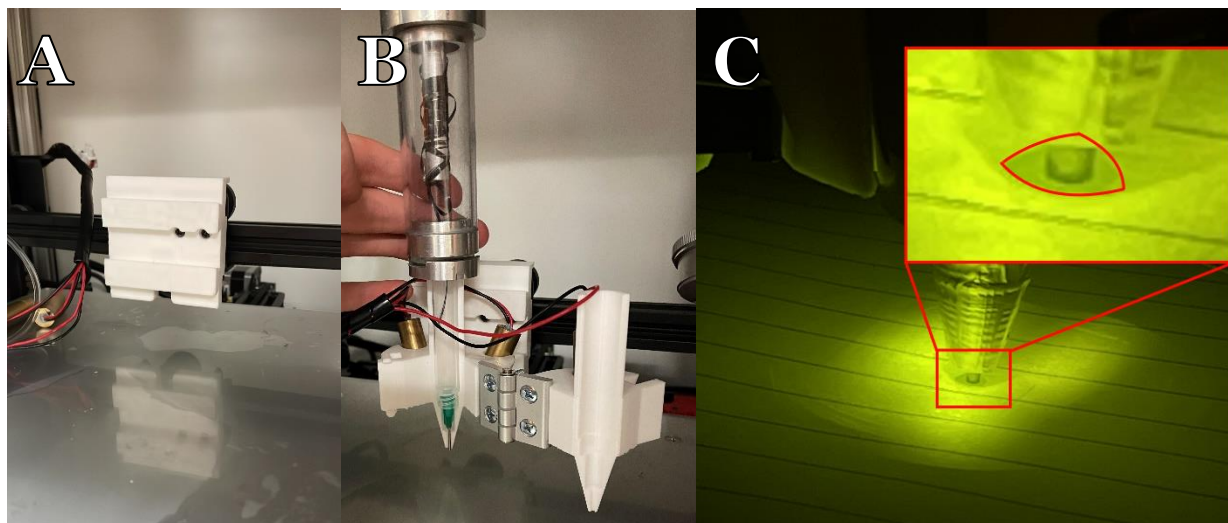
Print head MkII (a) dovetail mount, (b) assembled print head with hinge, and (c) shadow pattern
